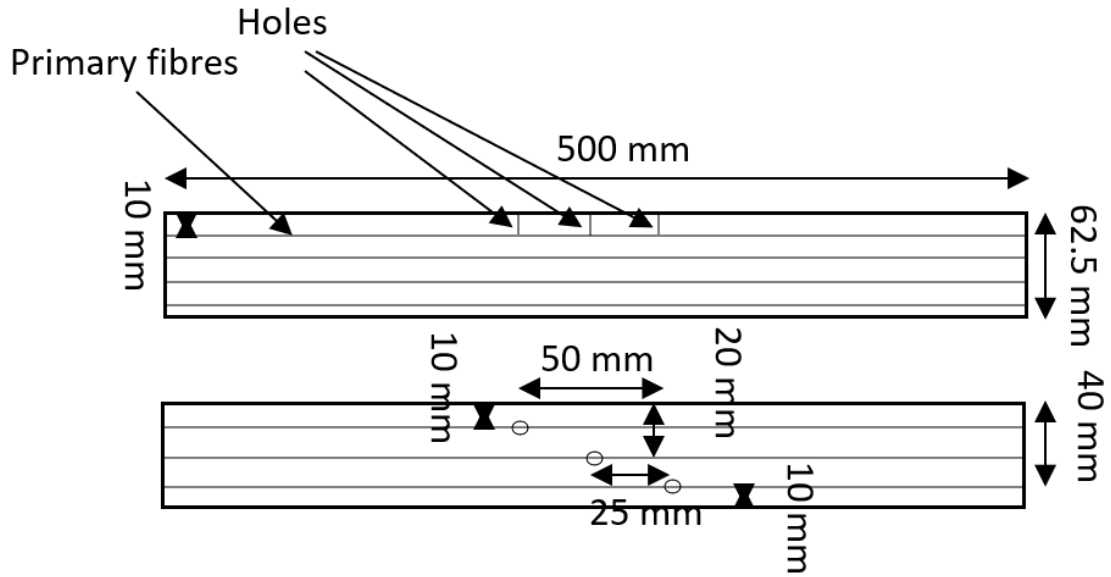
Locations of three drilled holes in unidirectional 40-mm specimen.
